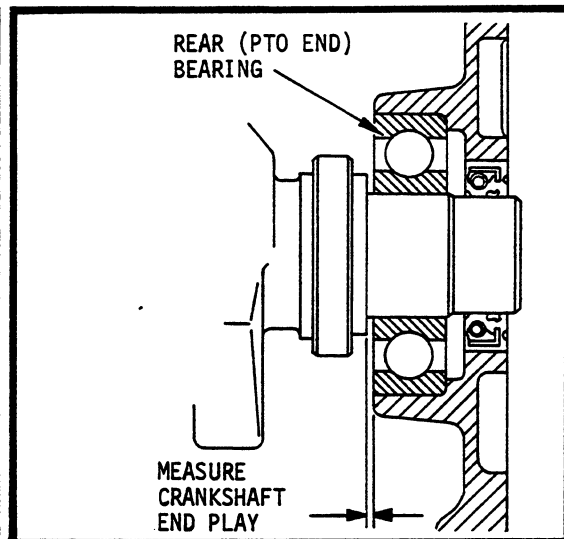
CRANKSHAFT END PLAY ADJUSTMENT
